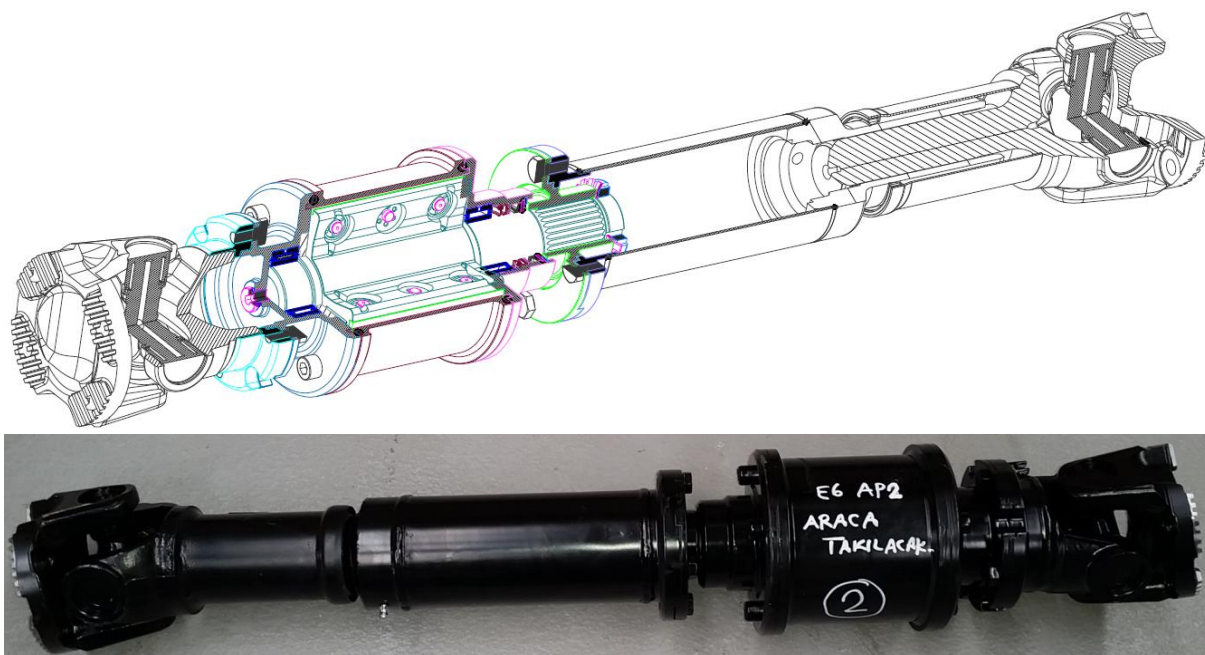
Production Drawing and Prototype of Long Drive Shaft with Viscous Coupling.
